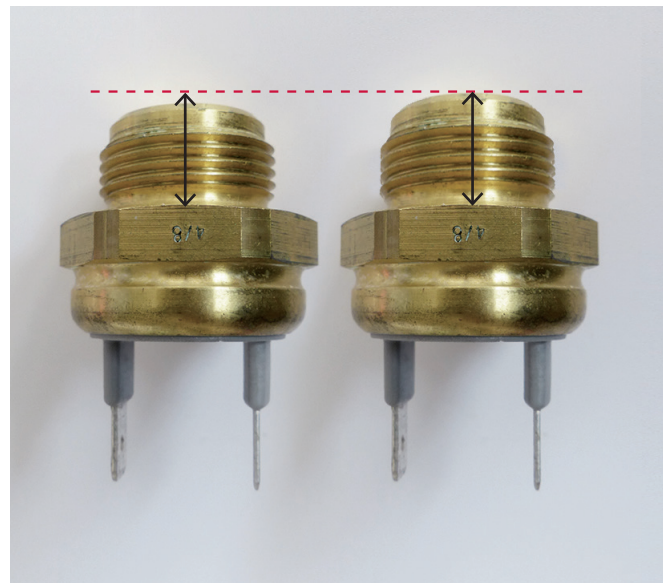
Different thread length due to excessive assembly torque, original condition on the left, and elongated due to excessive assembly torque on the right.
